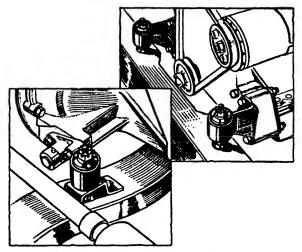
FOUR-POINT ENGINE MOUNTING (Above) Front mounting. (Below) One of the rear mountings.
